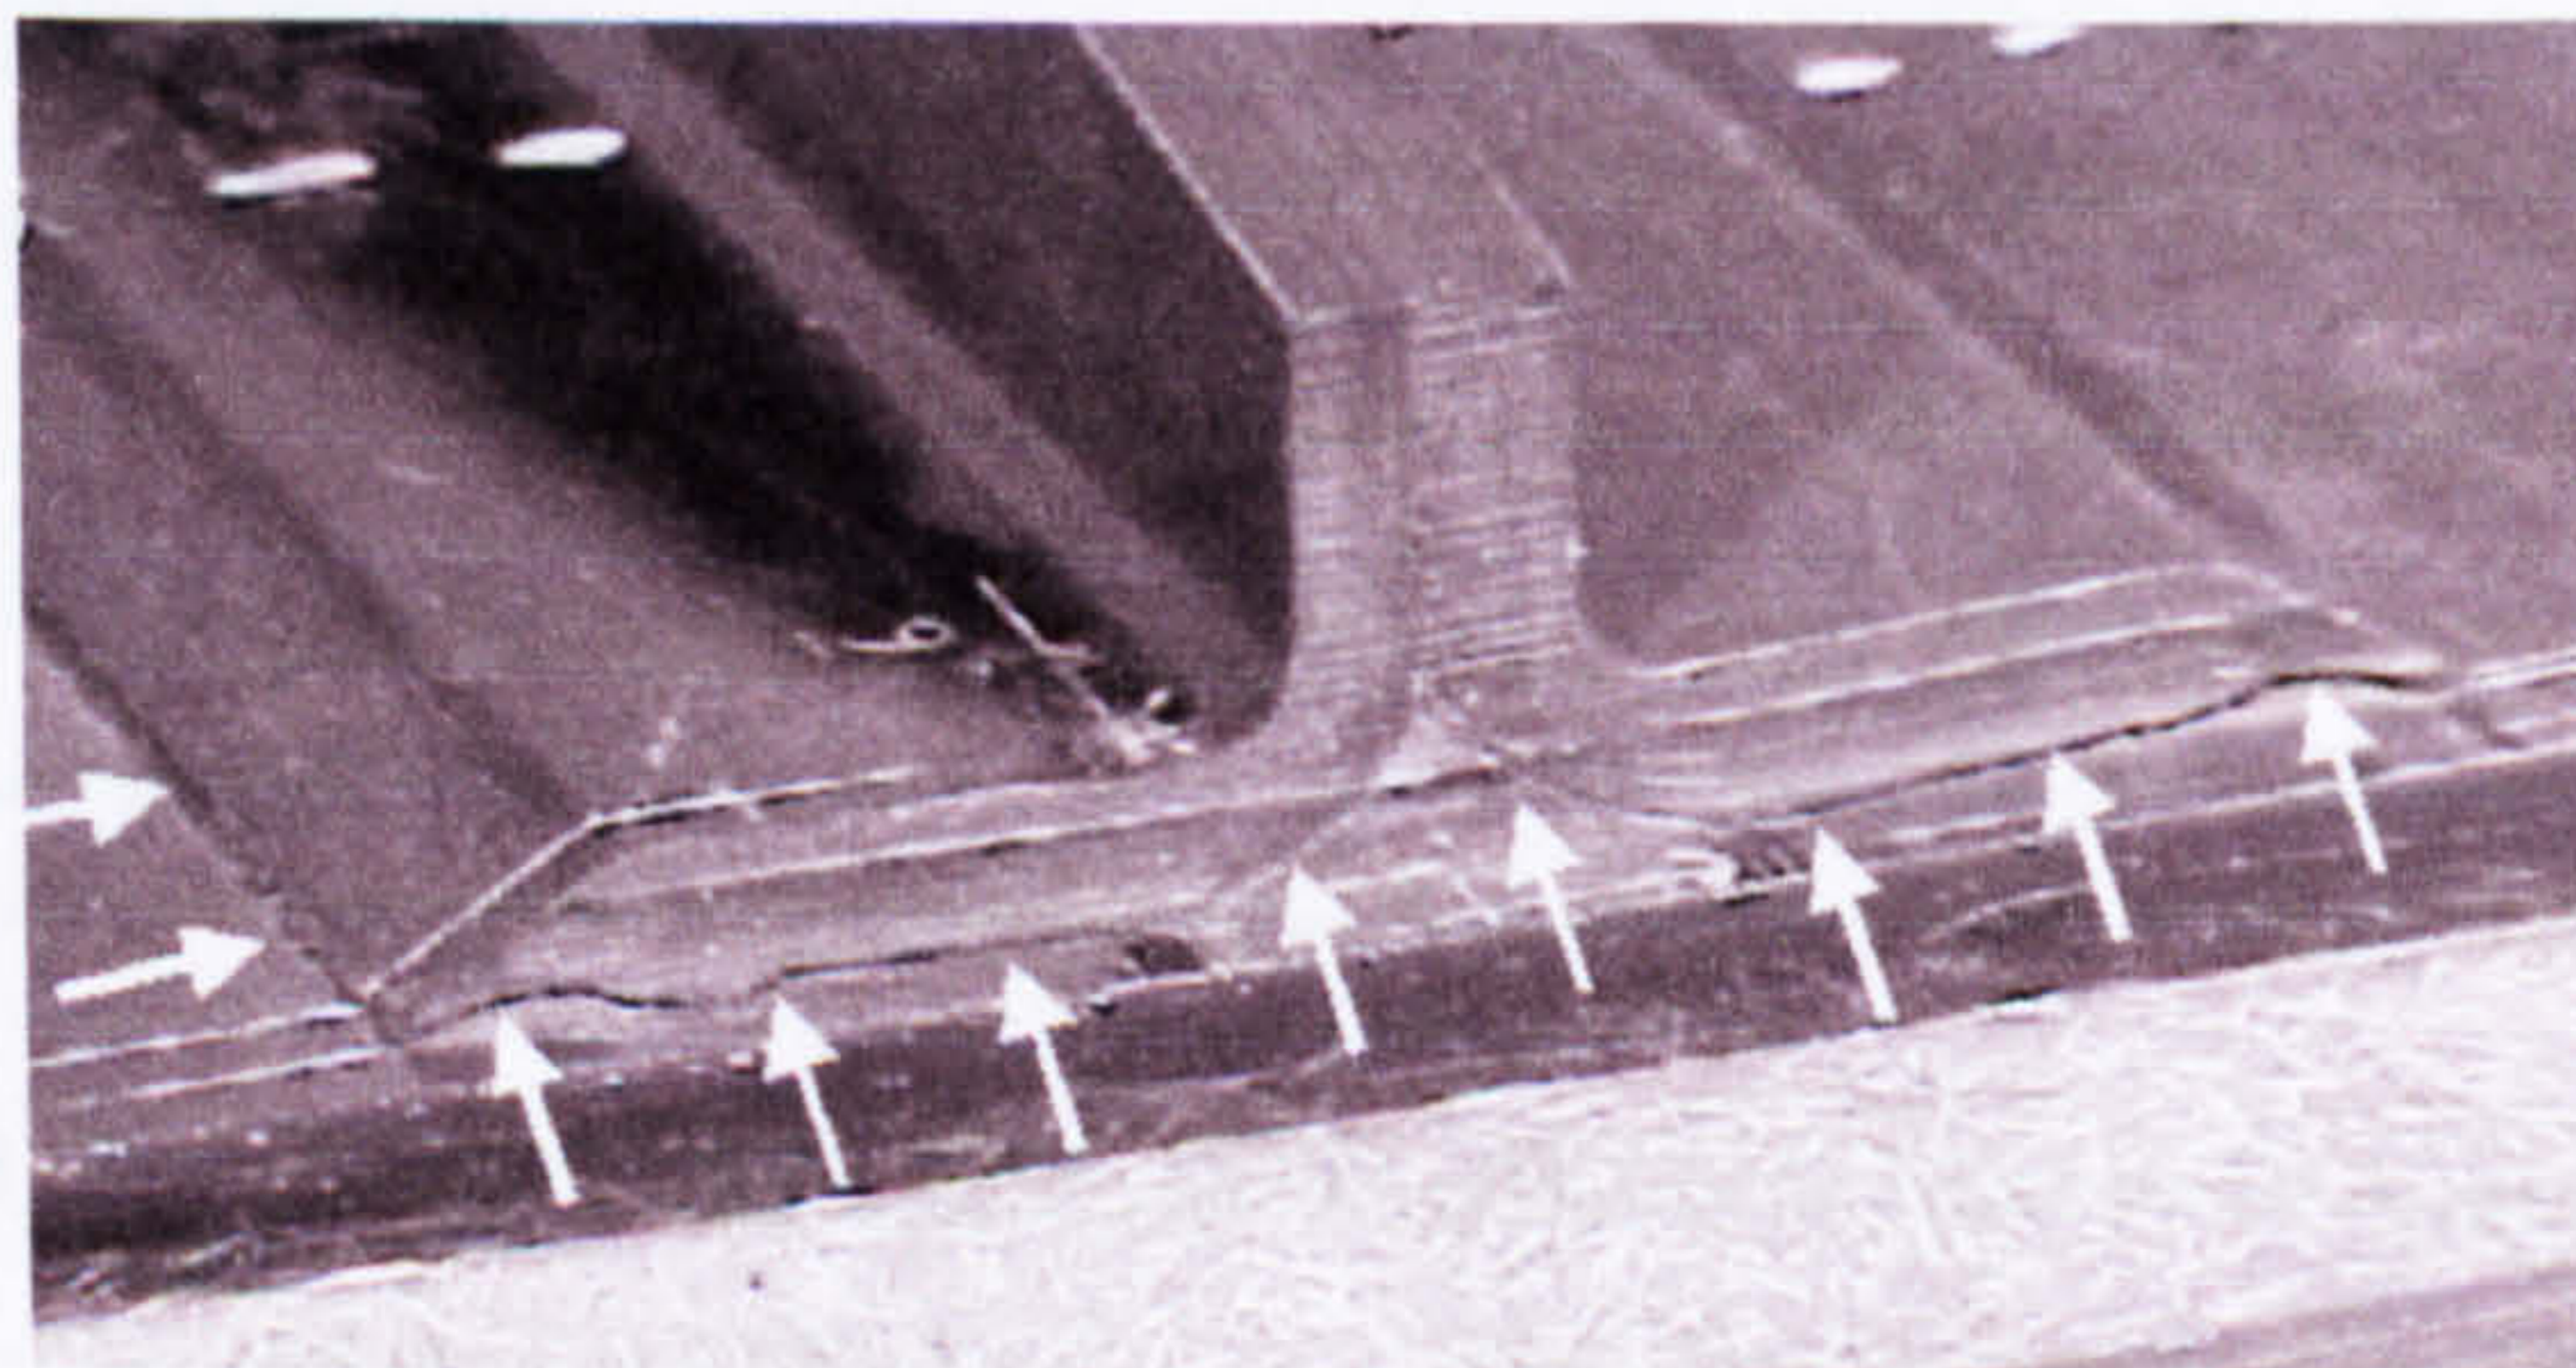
Section showing the crack across the skin-stiffener interface width of failed specimen B [58].
